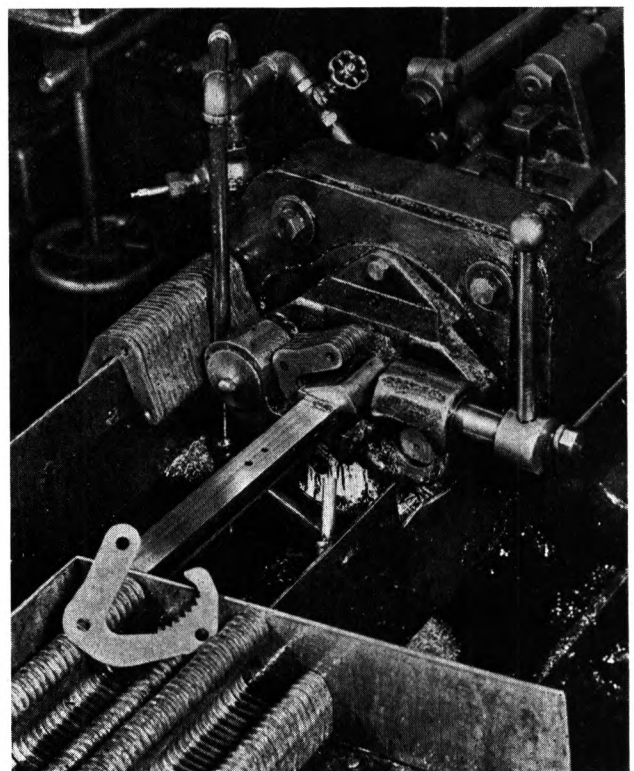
CUTTING GEAR TEETH OR SECTOR NOTCHES ON A HORIZONTAL HYDRAULIC BROACHING MACHINE, SET UP FOR FORMING THE NOTCHES IN THE BRAKE-SECTOR STAMPING
